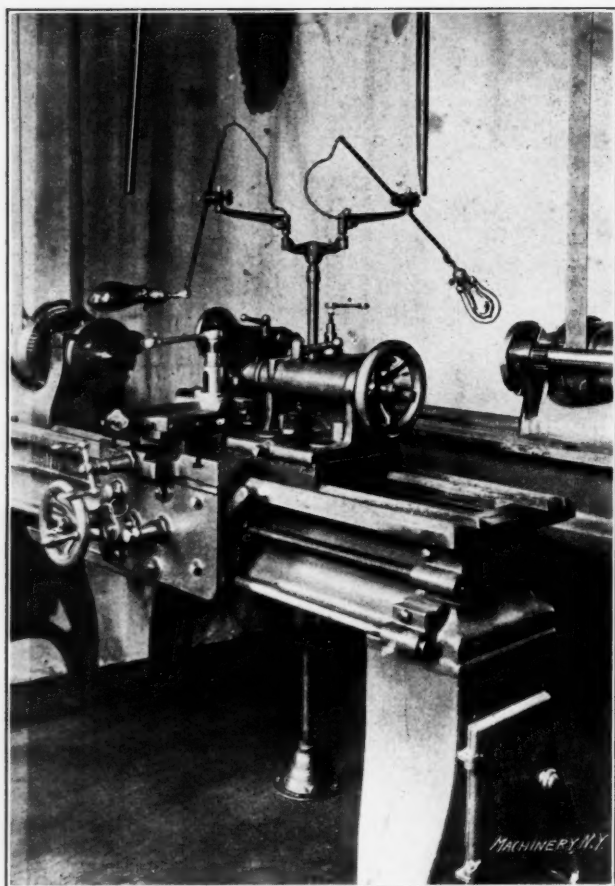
Engine Lathe with Electric Light Holder in Rear.
